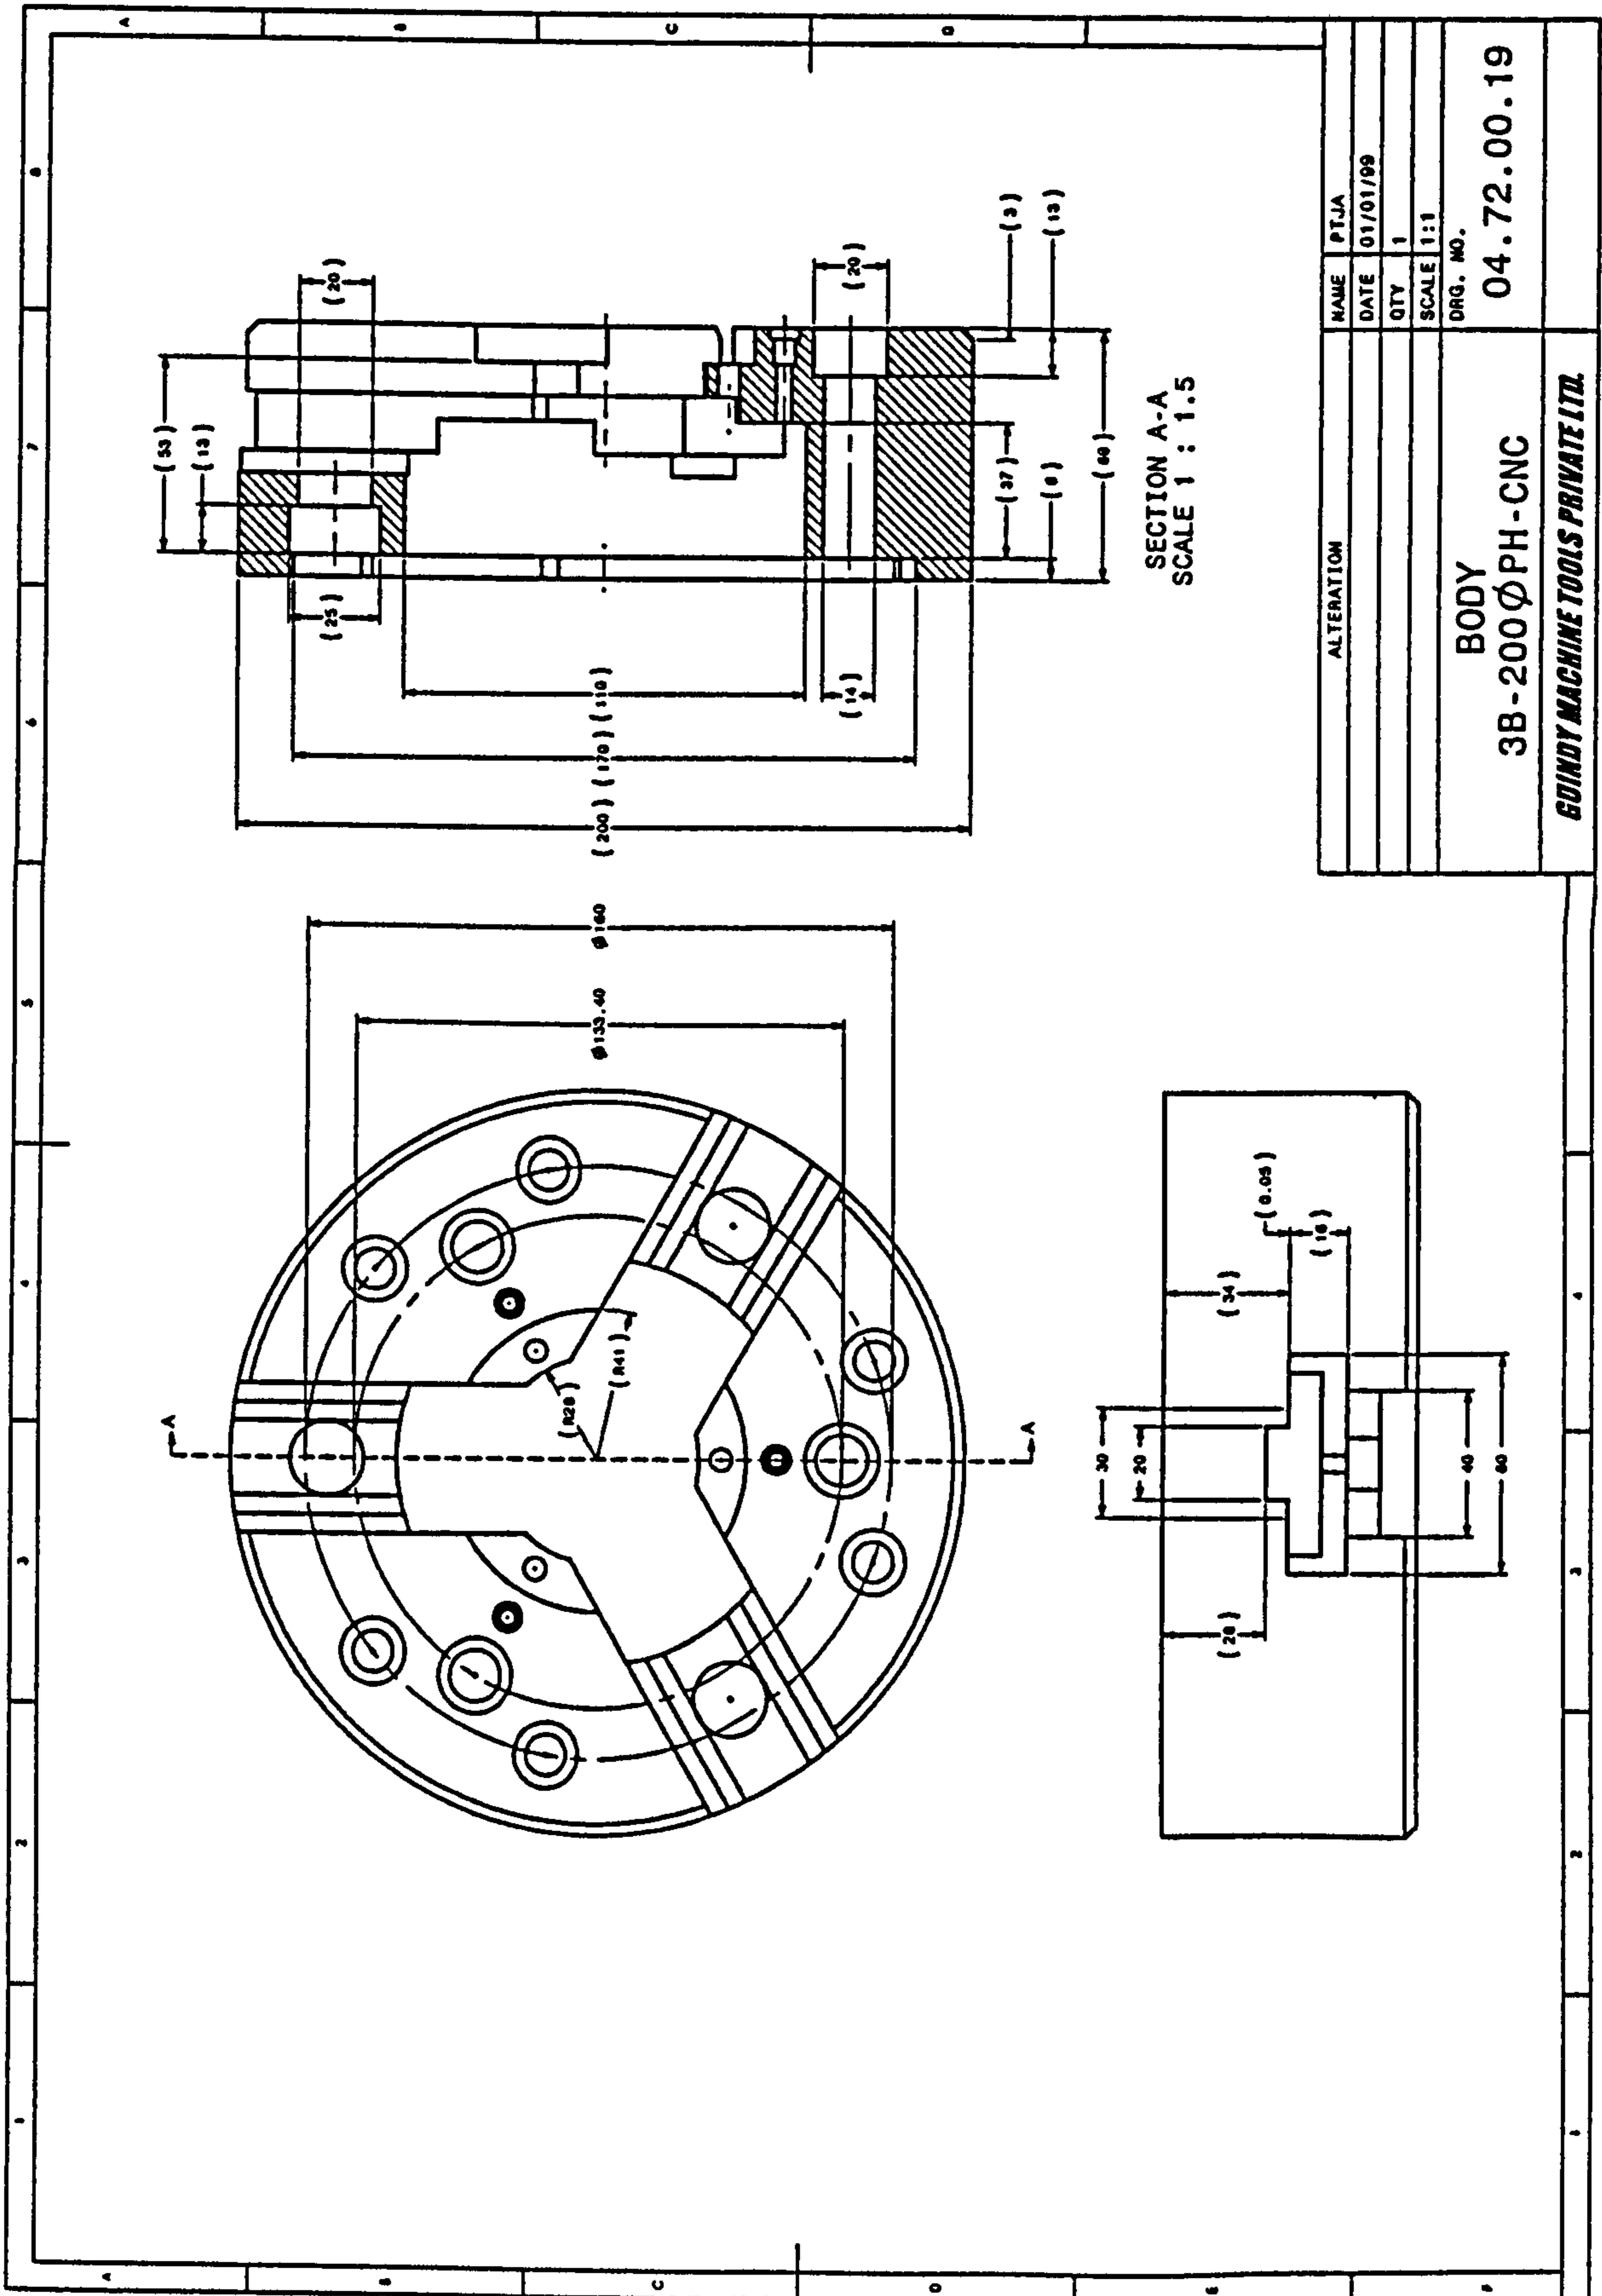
GMT Body – Pro/ENGINEER Drawing
